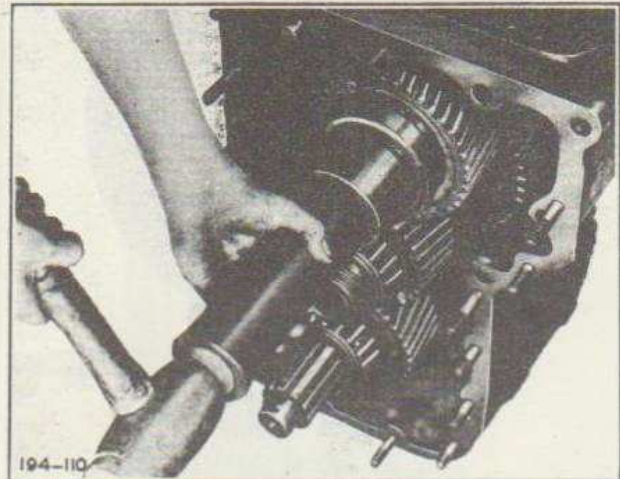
Installing Power-Take-Off Drive Shaft Clutch
